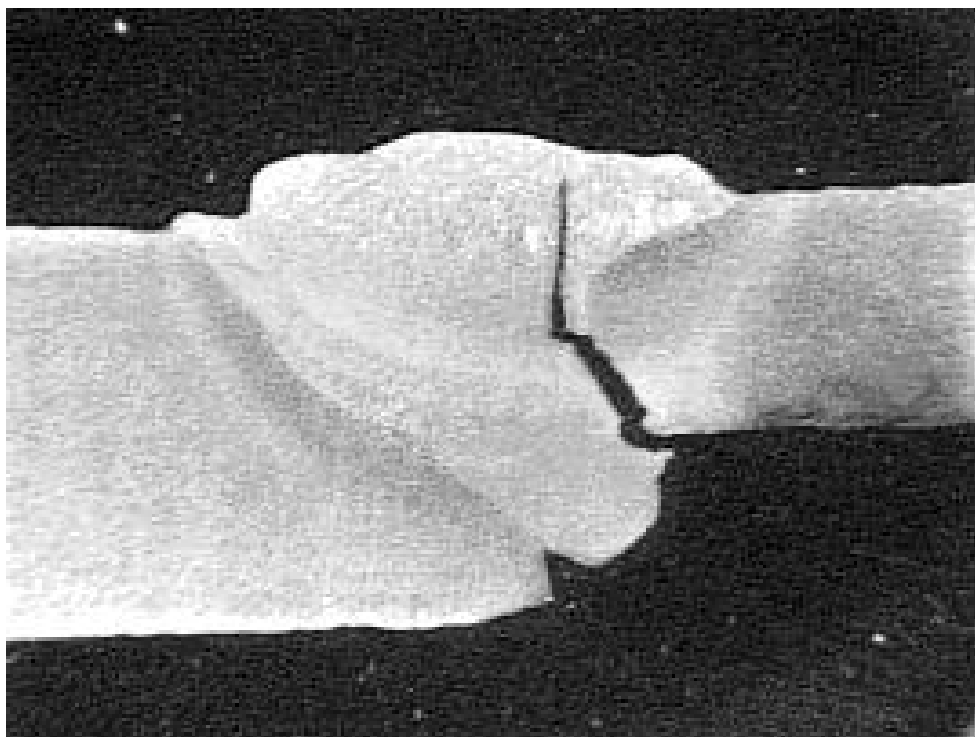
A cross section through the weld showing the crack location.
